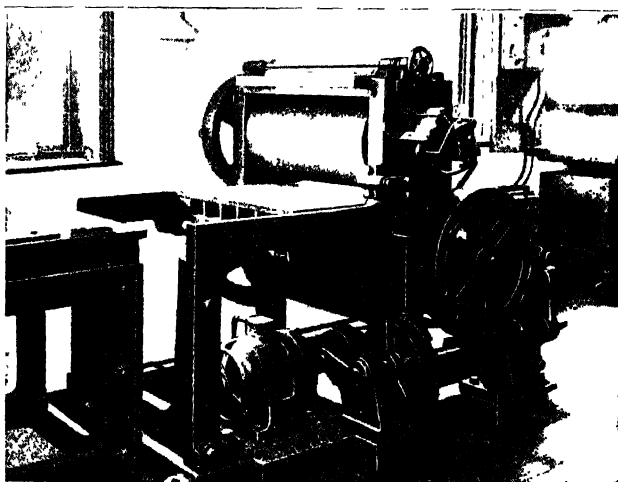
MATRIX ROLLING PRESS DRIVEN BY SQUIRREL-CAGE MOTOR
